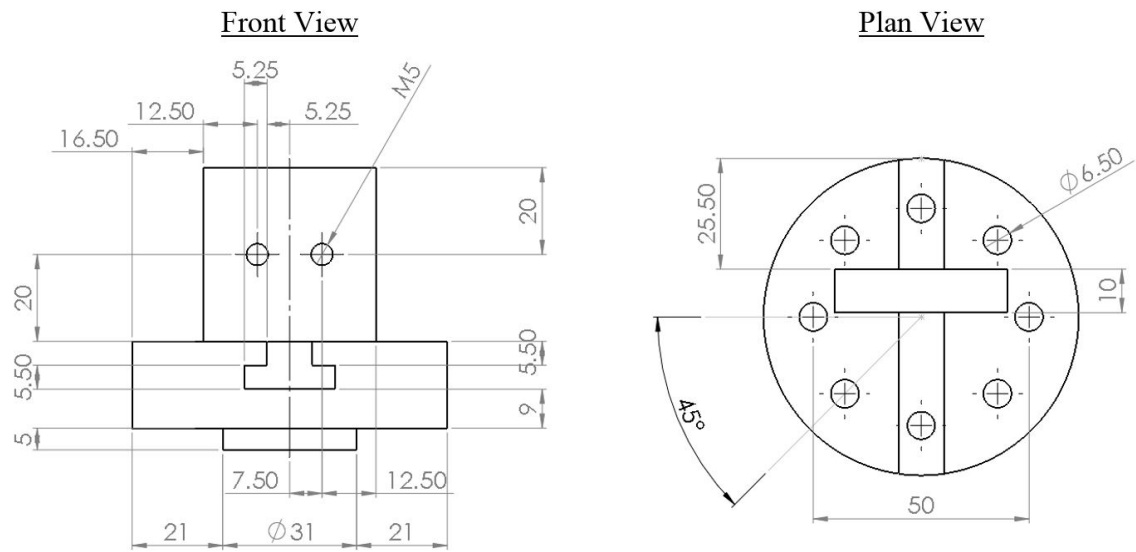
Dimensions of part A of the clamp assembly, from the front view and plan view.
